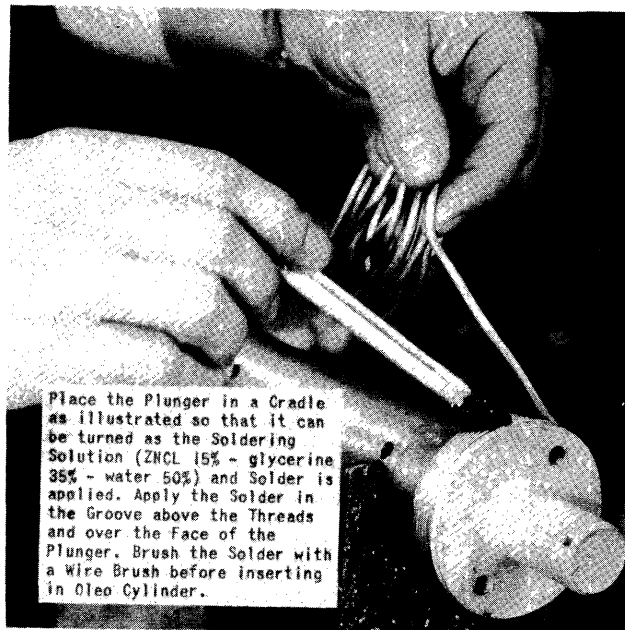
Applying Soldering Fluid and Solder to Plunger
